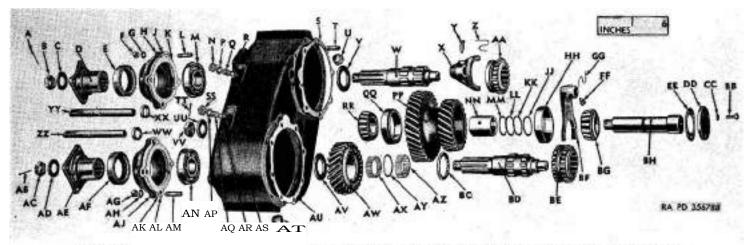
Transfer with idler gear, input shaft, front axle output shaft, and shifter parts—explcded view.
